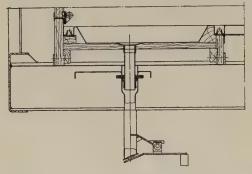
Trough for ice water of D. B. refrigerated wagon (longitudinal section of wagon). Scale approx. 1: 20.
